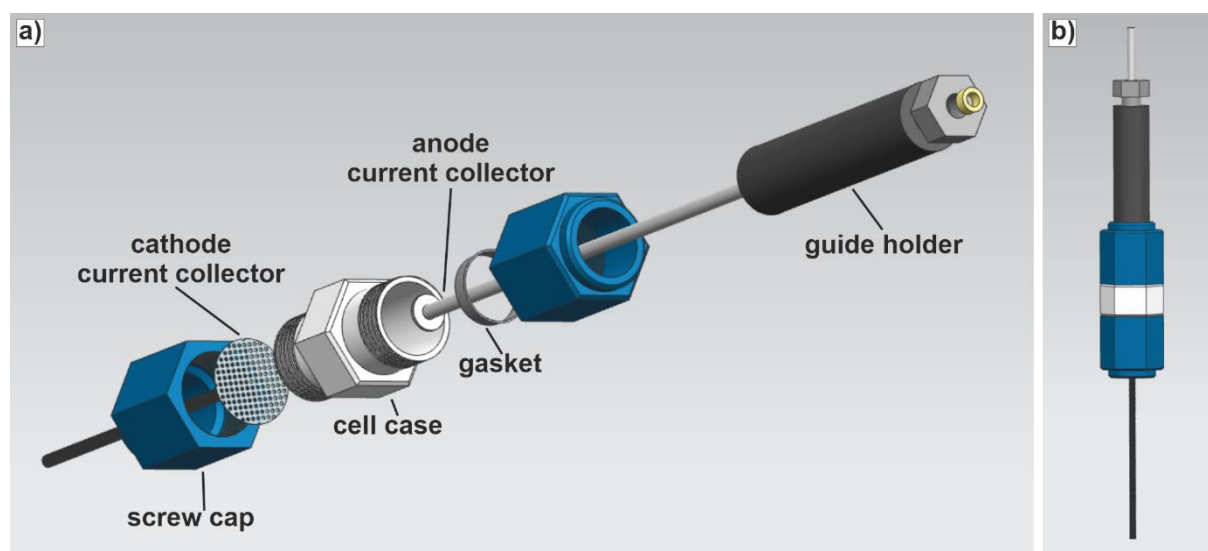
Two electrode zinc-air test cell for investigation of rechargeability in exploded view (a) and assembled view (b).^[28]
